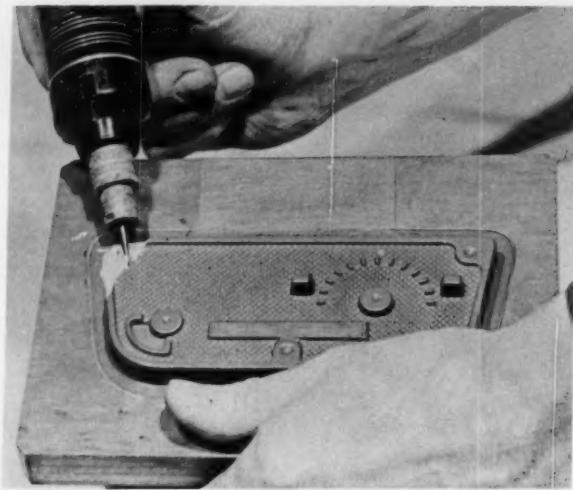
Broken section being undercut to anchor fusible alloy. Pouring hole drilled through to other side.
